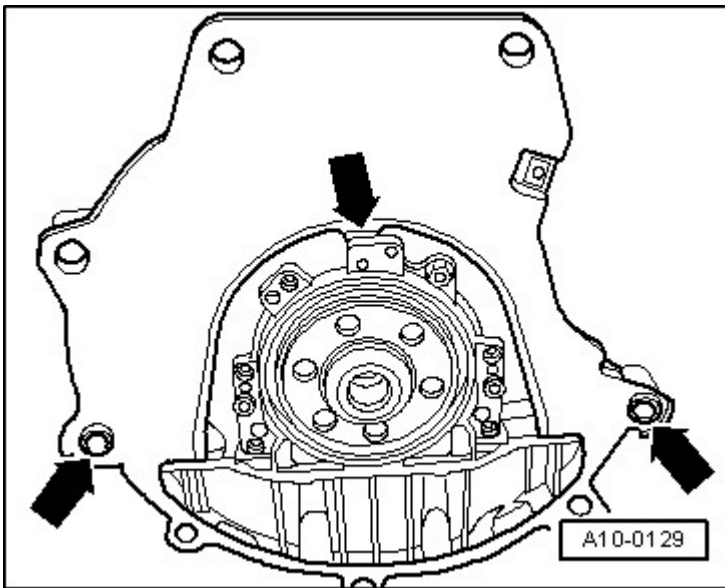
Identifying Intermediate Plate Alignment Bushings
